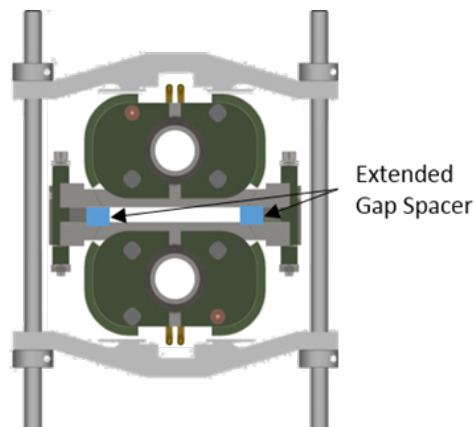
Assembled cores with external clamp and extended gap spacer.
